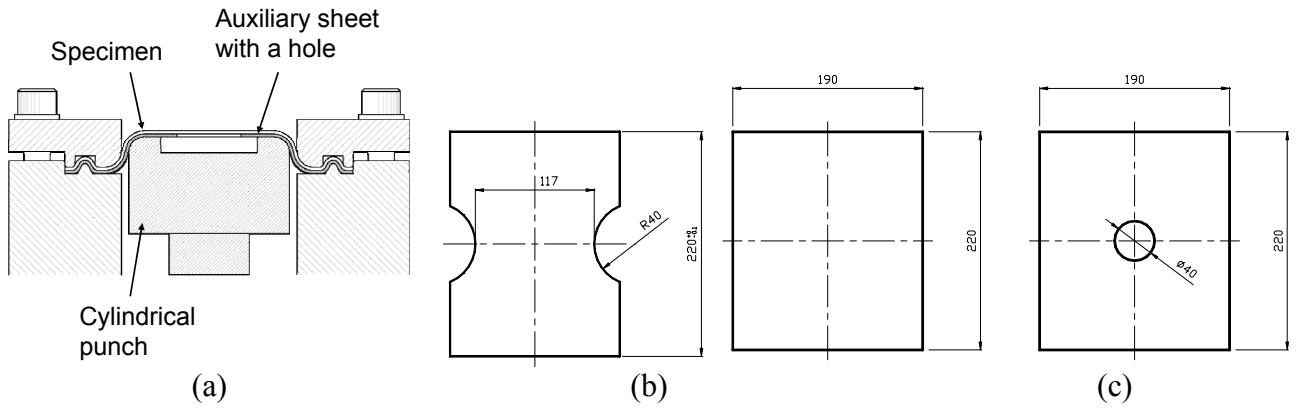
Experimental method for determining forming limit strains for sheet metals (Marciniak-Kuczyński method [8]); (a) punch-stretch testing apparatus, (b) specimens with different geometries, and (c) auxiliary sheet with a circular hole.
